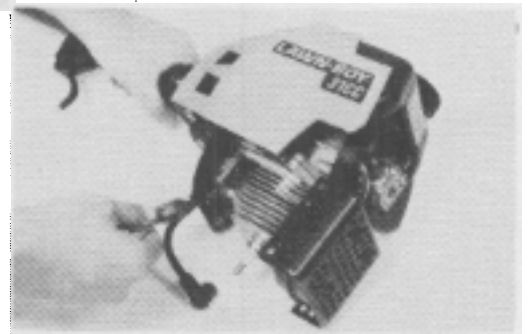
Remove (2) Wire Leads at Ignition Module. Be sure that wire leads are secured in retainer slot before reassembly.
